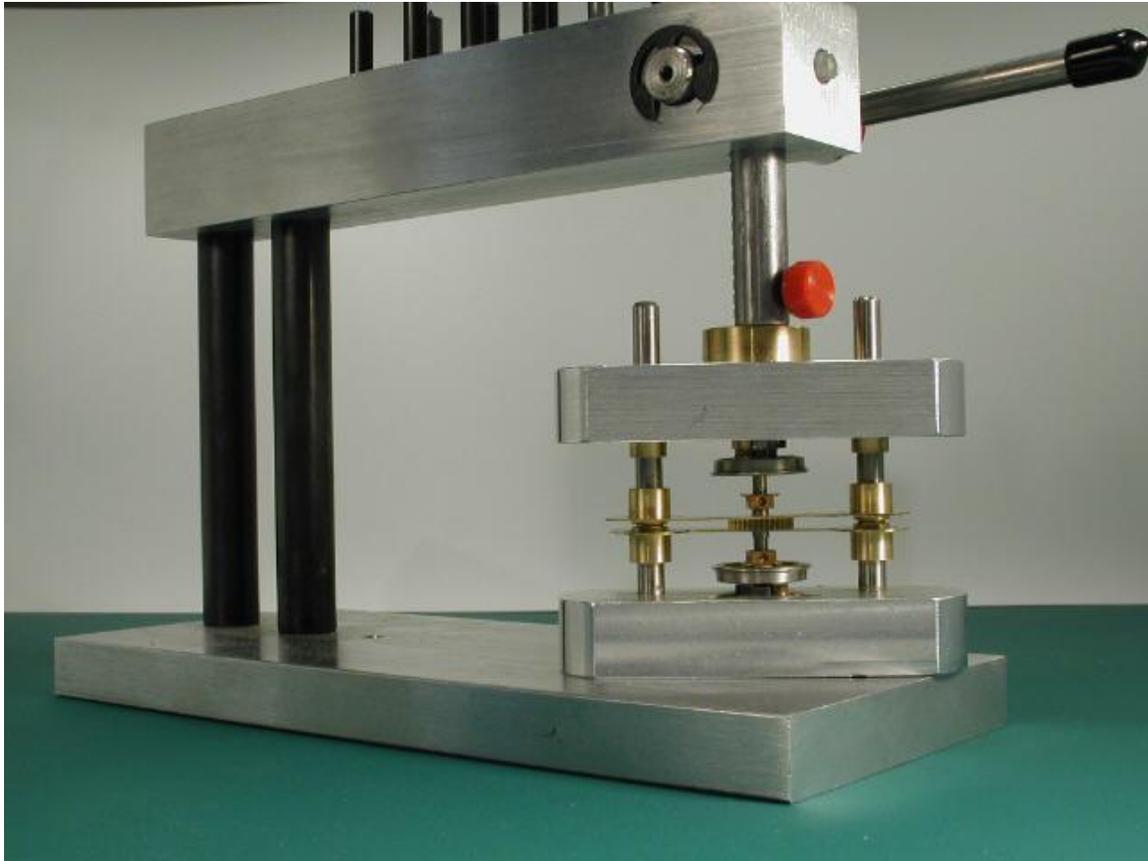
The driver assembly and jig is now placed in the NWSL Sensipress, and the assembly is pressed home. Is this cool or what ?!!
